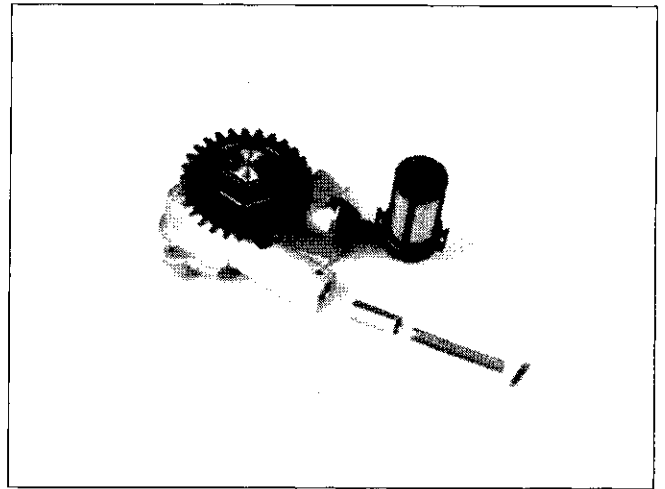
Oil Pressure Relief Valve Piston and Spring.
